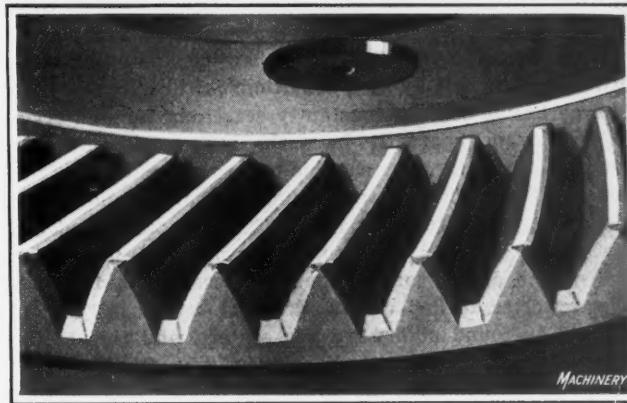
Section of a Ring Bevel Gear showing Teeth which have been chamfered
